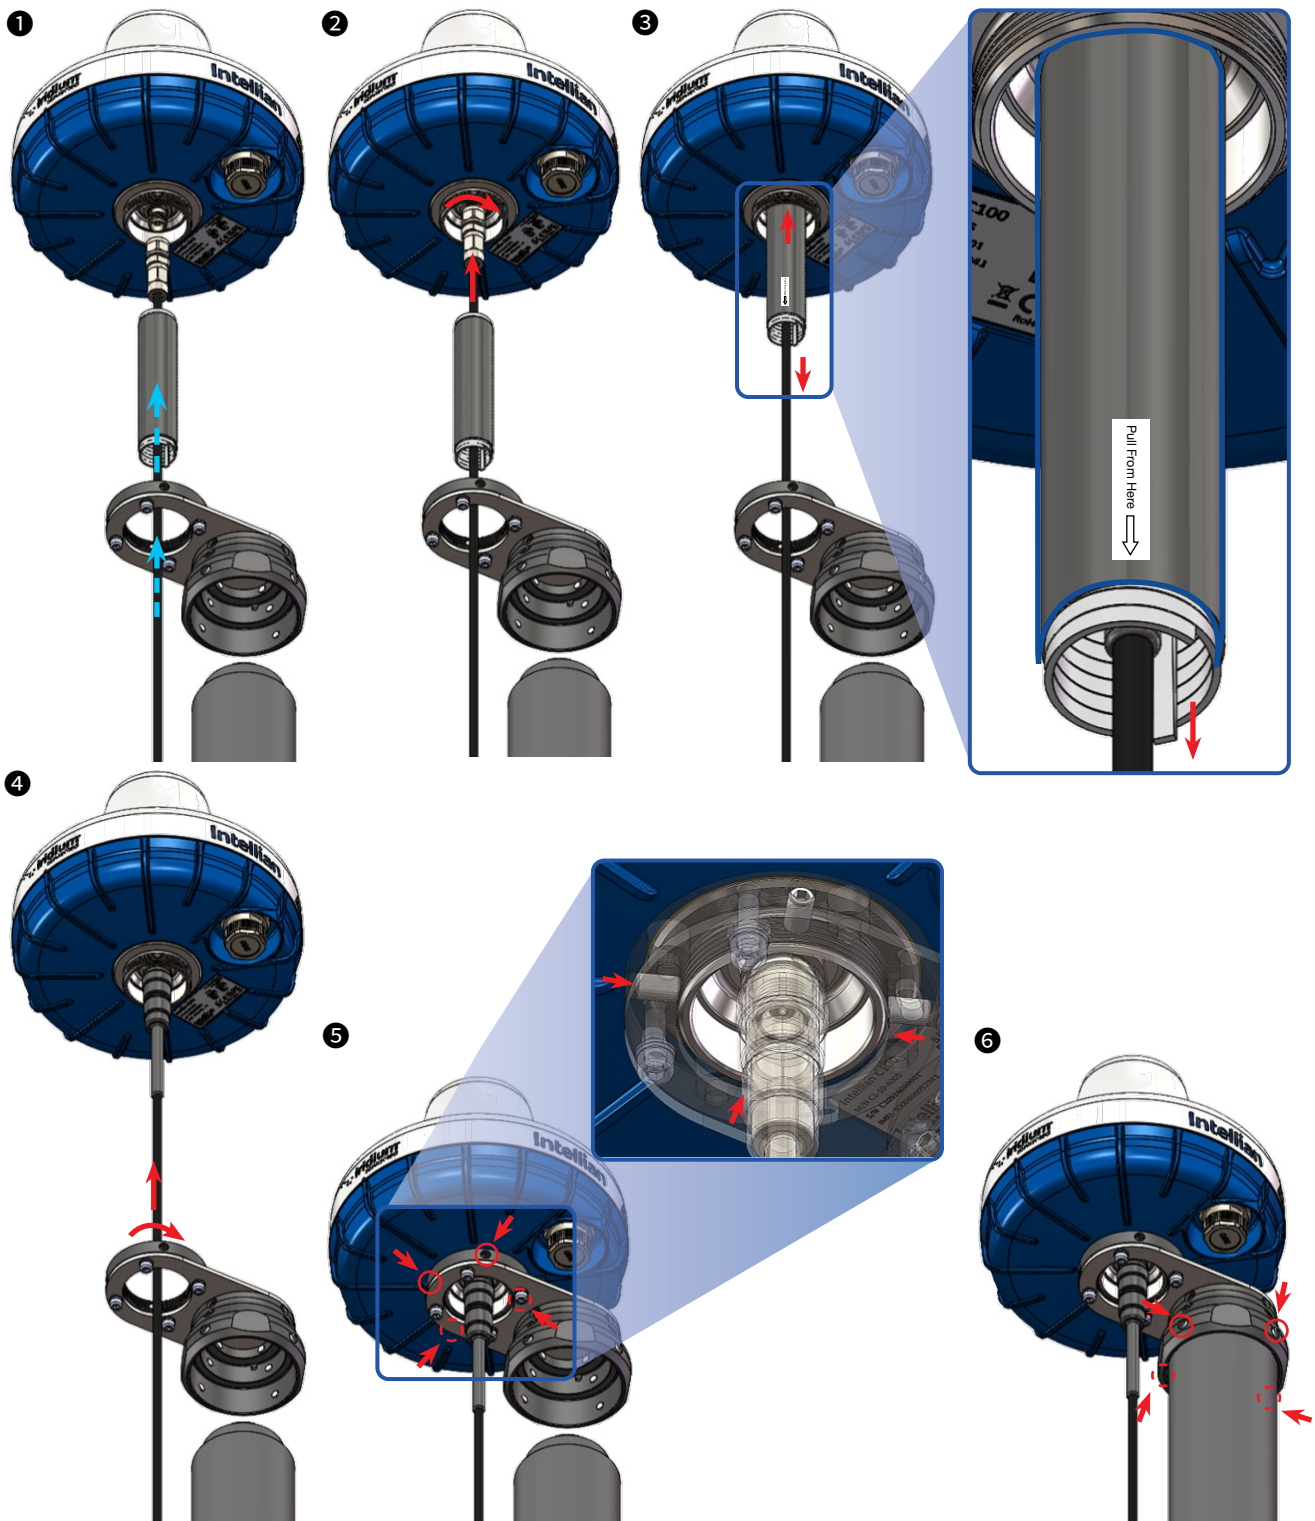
Aligned Mounting with Internal TNC Cable Installation
